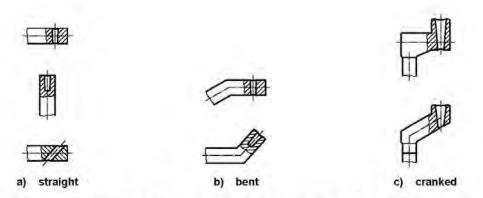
Electrode holders with female taper for spot welding electrodes (fluid cooling is not illustrated)
